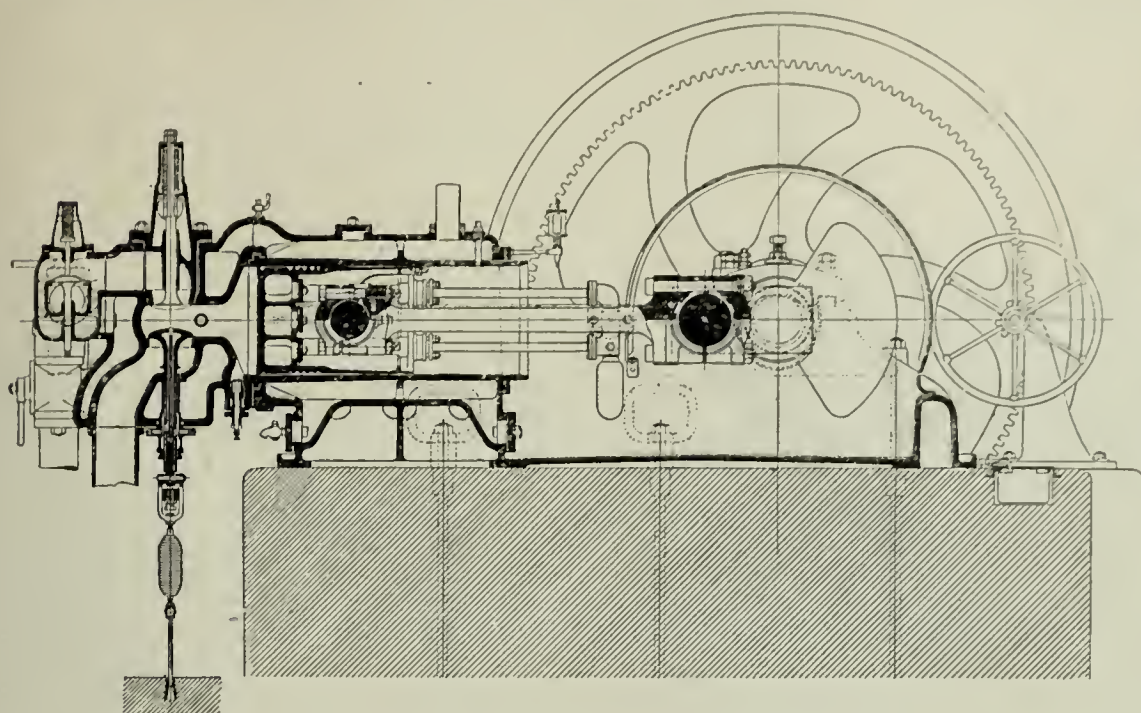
LONGITUDINAL SECTION OF KYNOCH ENGINE.
